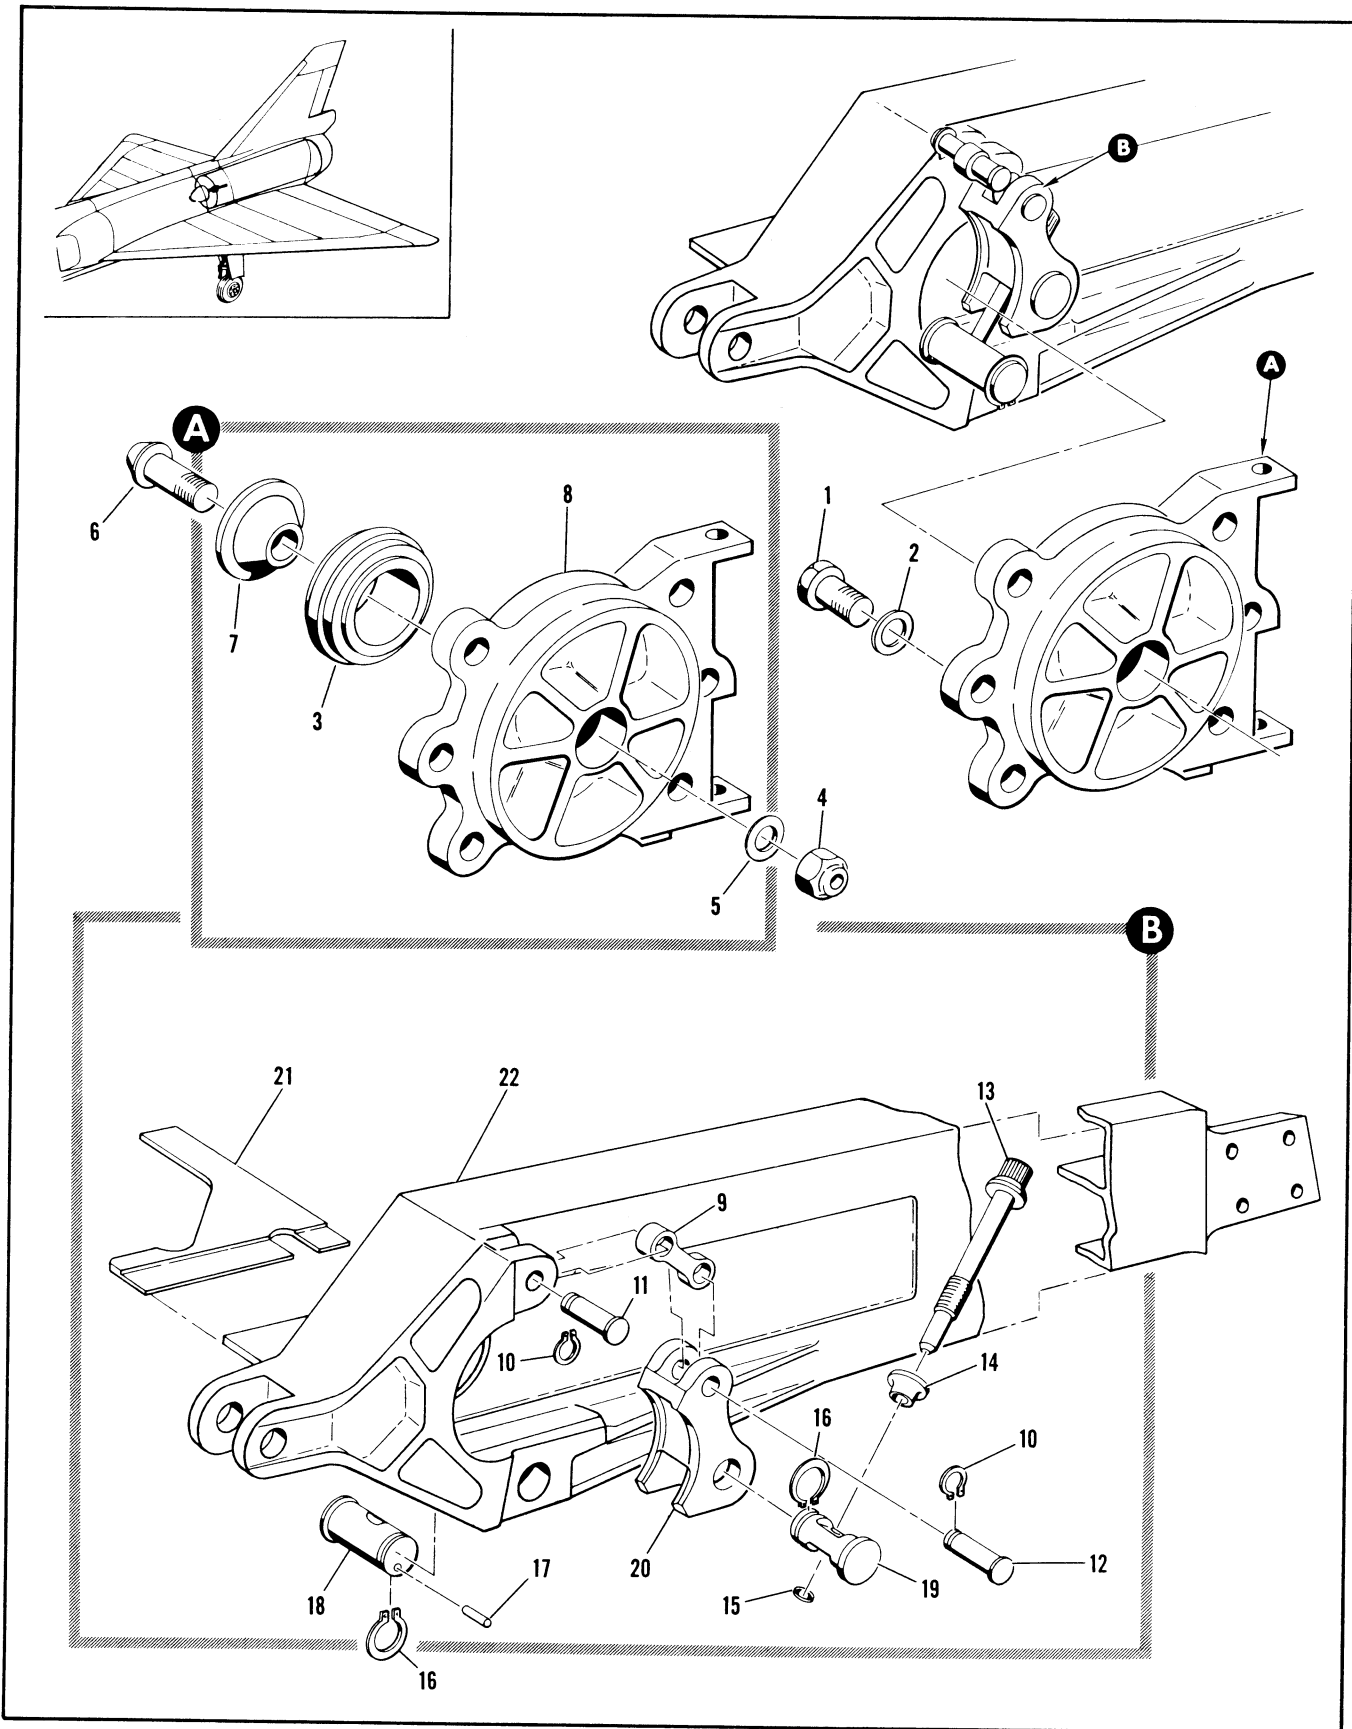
Engine Thrust Bearing Support and Clamp
